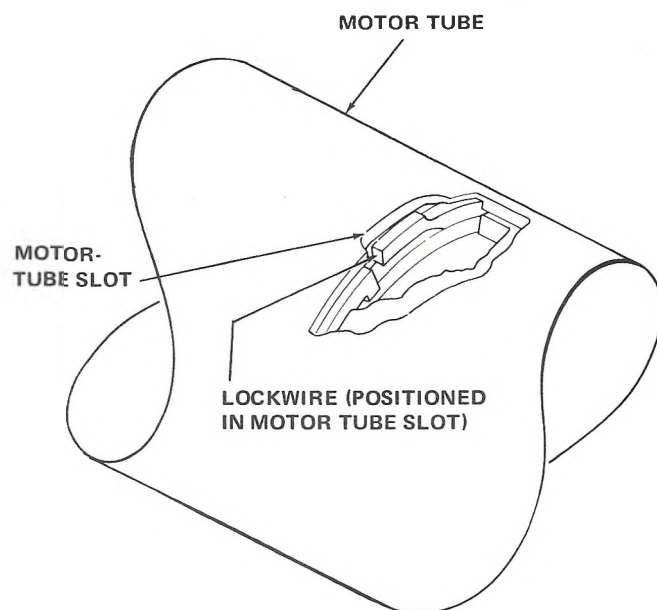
2.75-Inch Rocket Motor Tube Lockwire Slot
